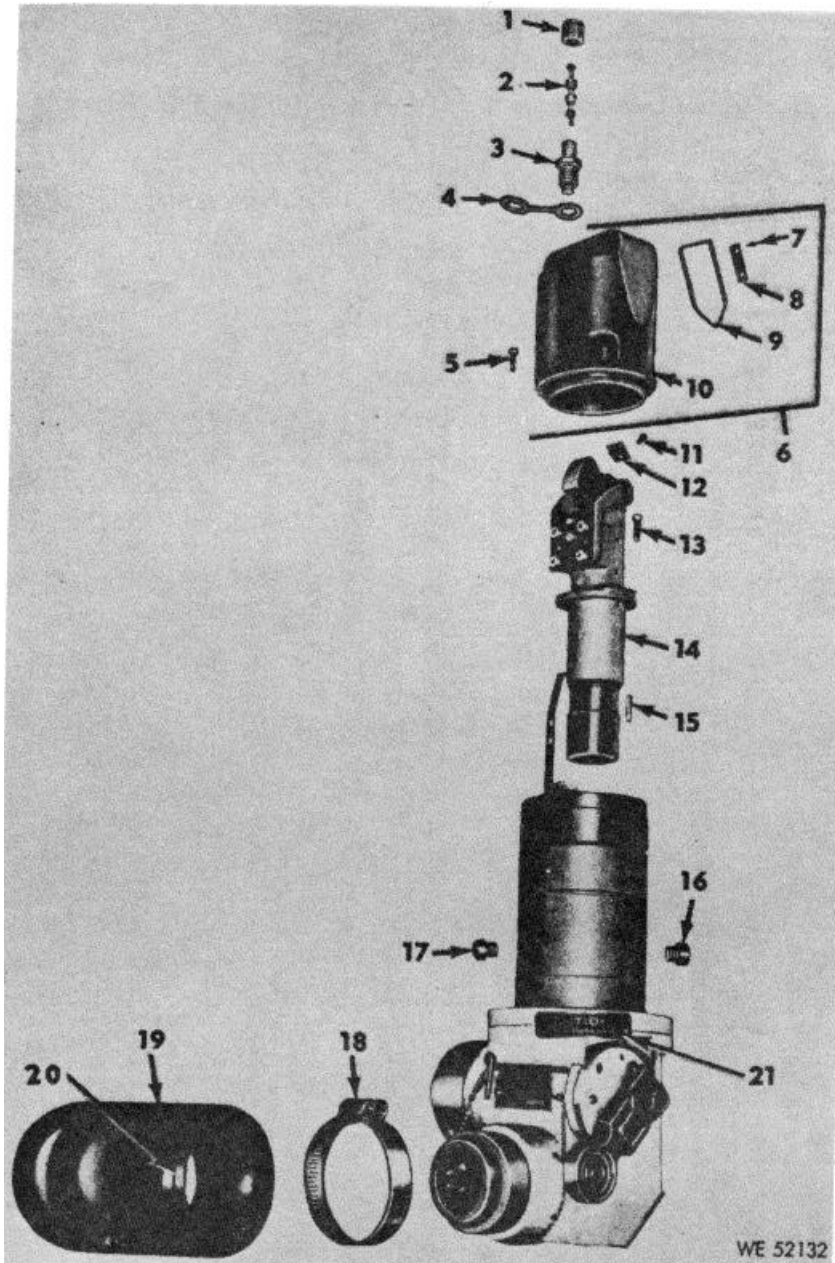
Sight, periscope M28, (8270601), M28C (8293452), or M28D (8565458) -partial exploded view.
